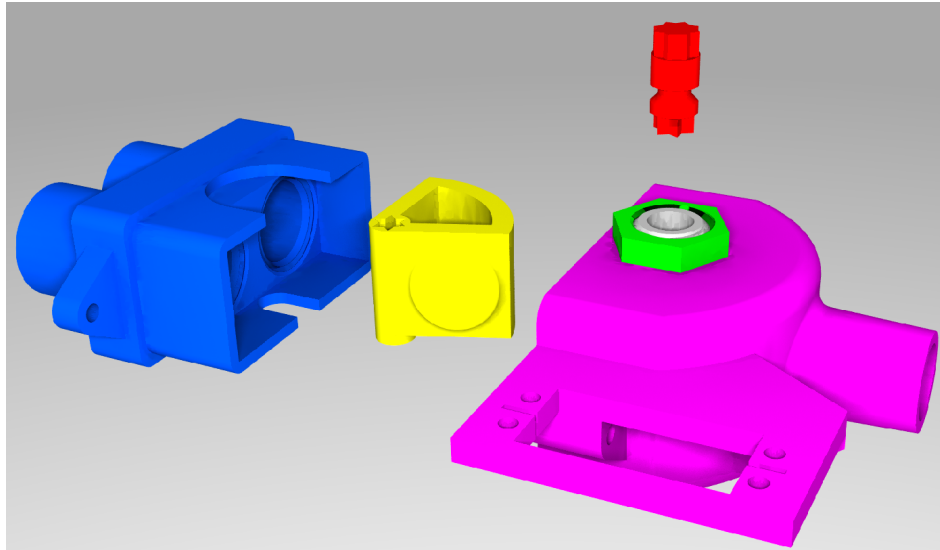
Partial exploded view of the valve. For a colour key see [50].
